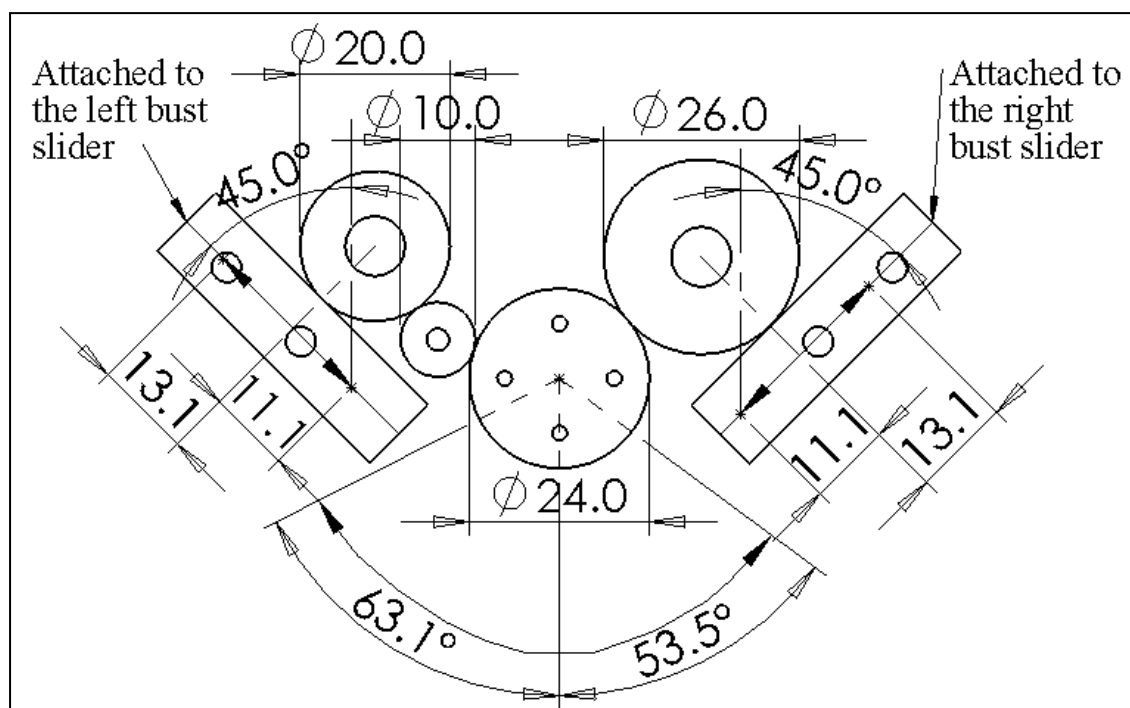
Bust mechanism schematic diagram. The solid arrow shows the movement direction. All the linear dimensions are in mm.
